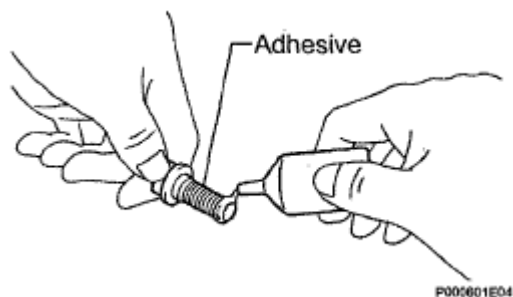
Applying Adhesive To Threads Of Mounting Bolt End
